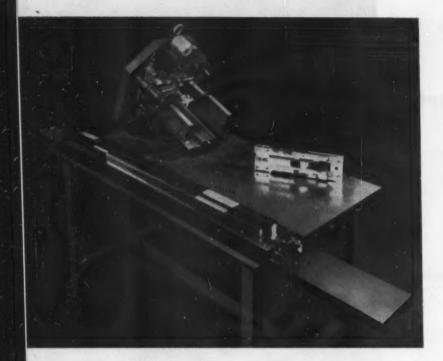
The two dovetail broaching tools, each made up of five sections, are mounted in the same holder. Finished operating-slide body is also shown on the table.
